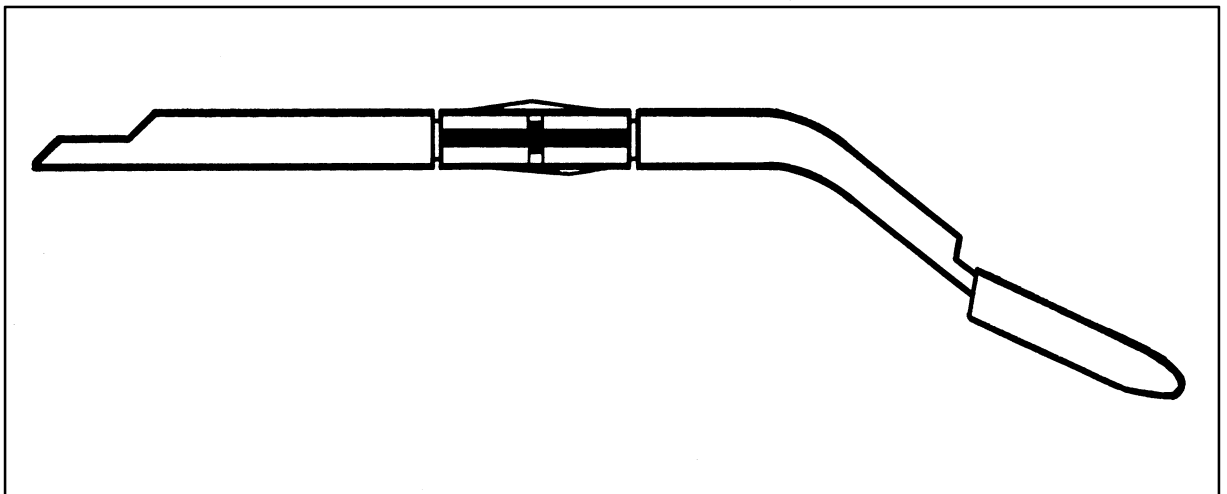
TEMPLATE FOR RECORD SPINDLE
